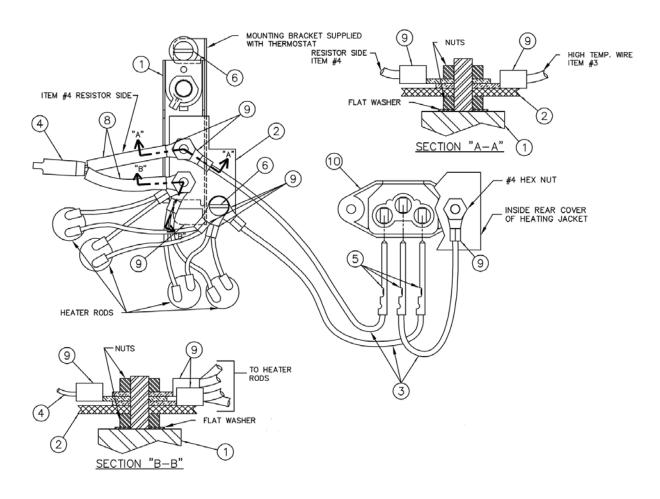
Thermostat Wiring Assembly, 500 ml, 115V
